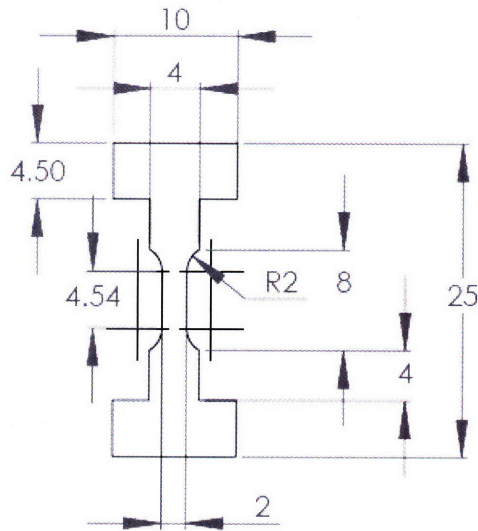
Geometry of mini-specimens cut from large pre-strained specimens (dimensions in *mm*).
